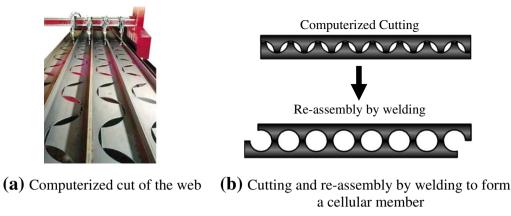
Manufacturing of cellular beams (by permission of Westok Ltd. http://www.asdwestok.co.uk). (a) Computerized cut of the web. (b) Cutting and re-assembly by welding to form a cellular member.
